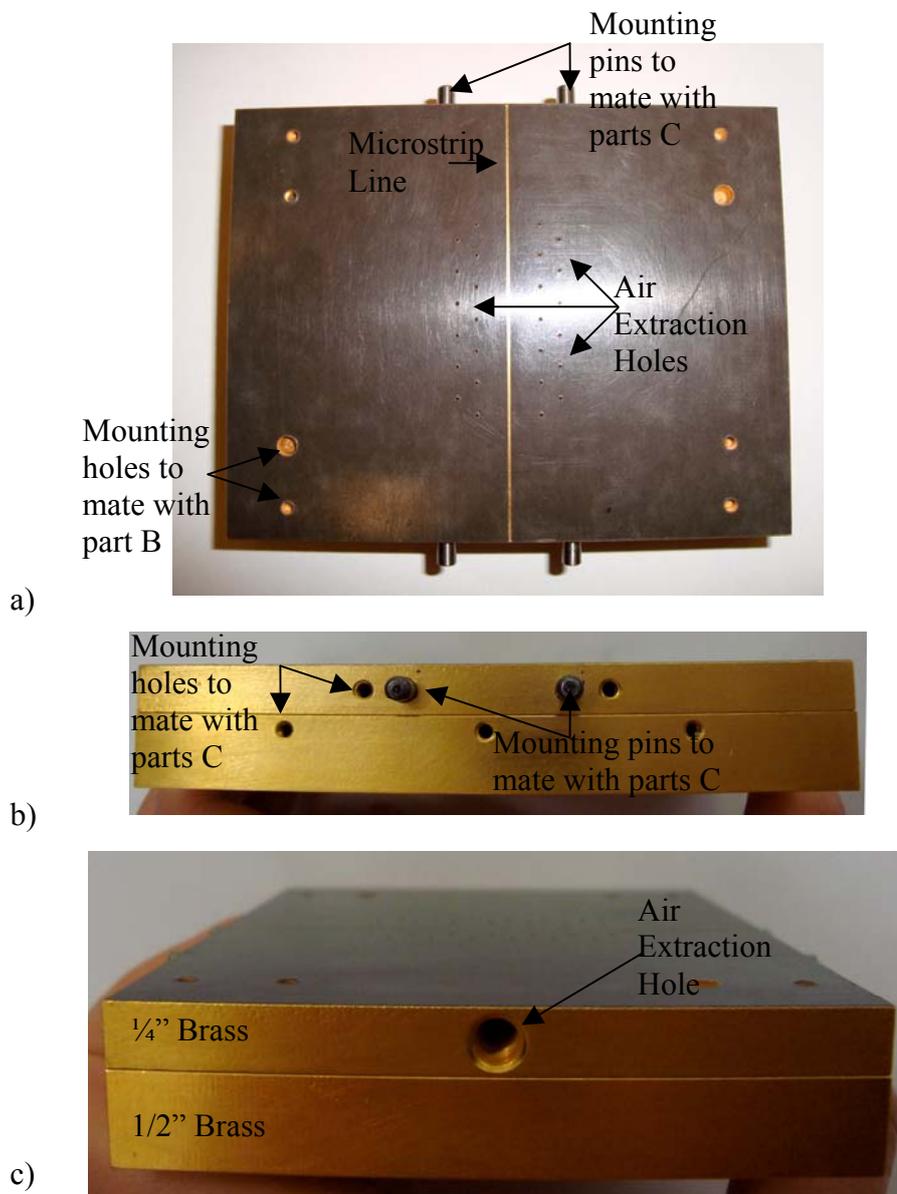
RF Test Fixture Part A a) Top View; b) Connector Side View; c) Air extraction side view.
